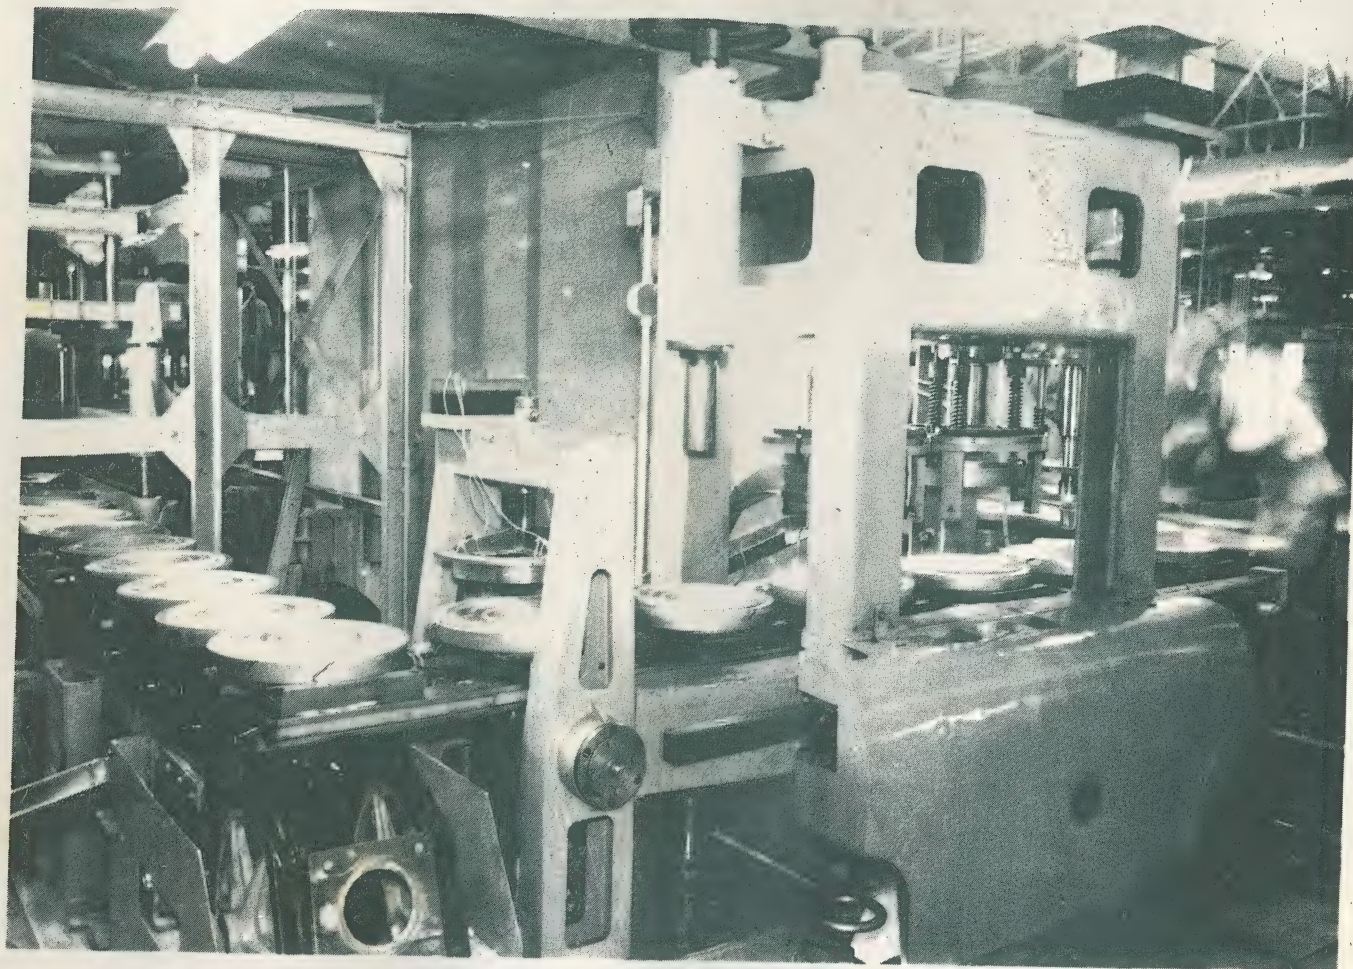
Formed suspension insulator shells being conveyed to mold release dryer, Komaki factory, NGK
